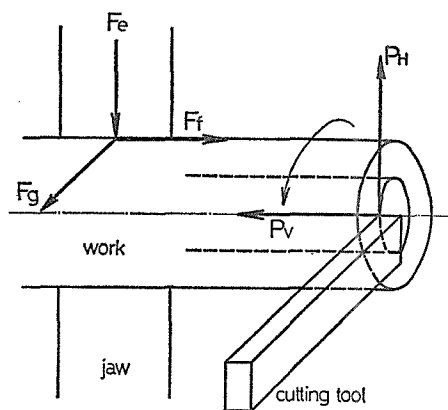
Two dimensional cutting and the forces that occurs subsequently
